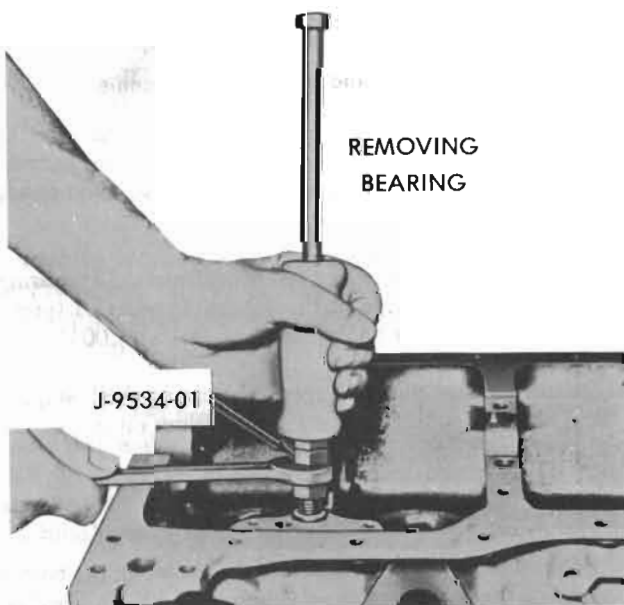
Replacing Distributor Bearing and Thrust Washer
